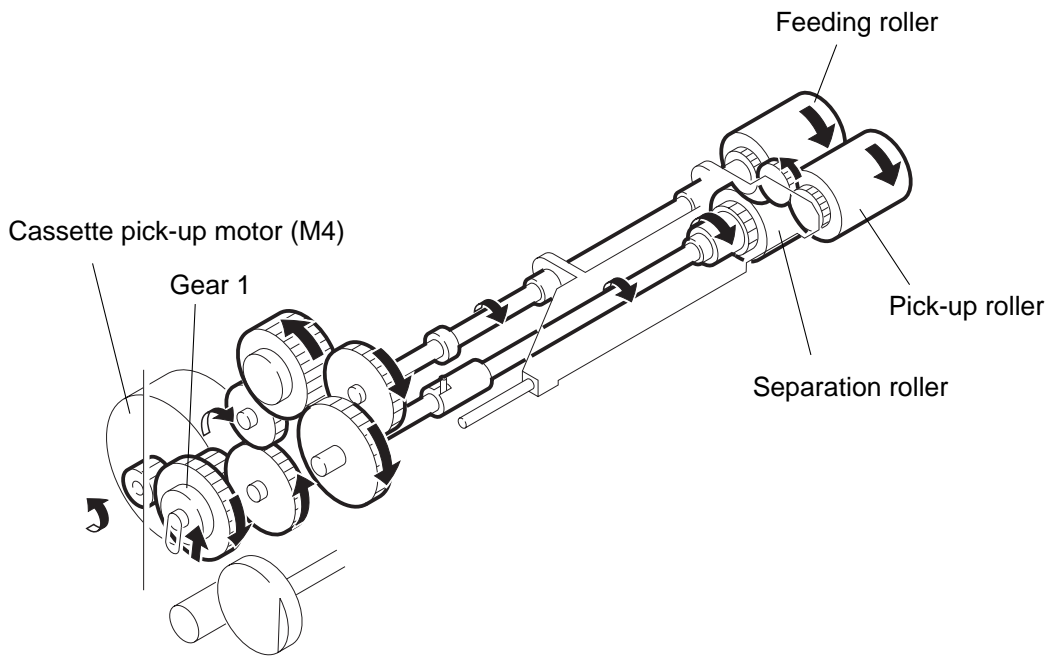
Pick-Up Drive for the Upper Cassette (pick-up motor rotating CW)
